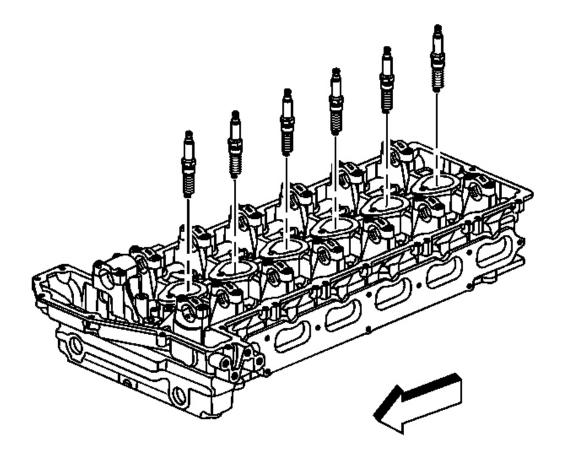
View Of Spark Plugs Courtesy of GENERAL MOTORS CORP.
